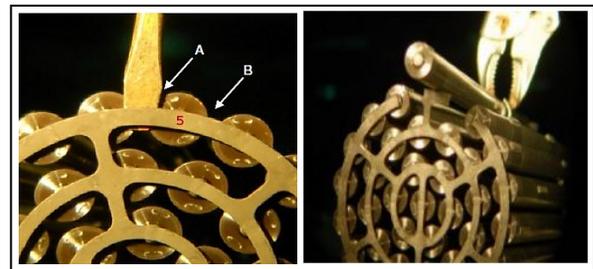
Element Disassembly and Transfer with Pry Tool and Element Gripper
